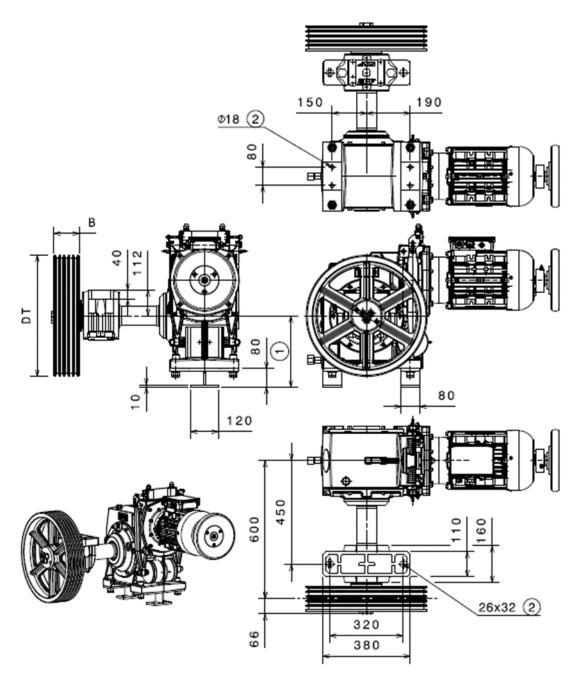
TW63B machine - additional dimensions for version of traction sheave in the shaft (SA9)(shown: motor position - horizontal, motor version V3F and support for external bearing upwards)
